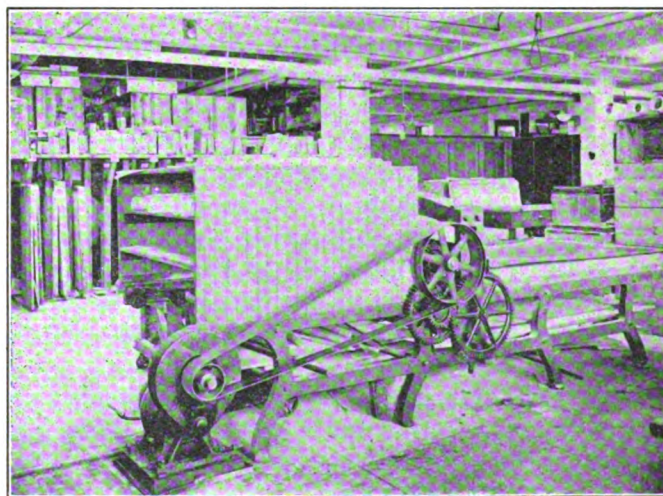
LITHO TRANSFER PRESS EQUIPPED WITH BACK-GEARED MOTOR
